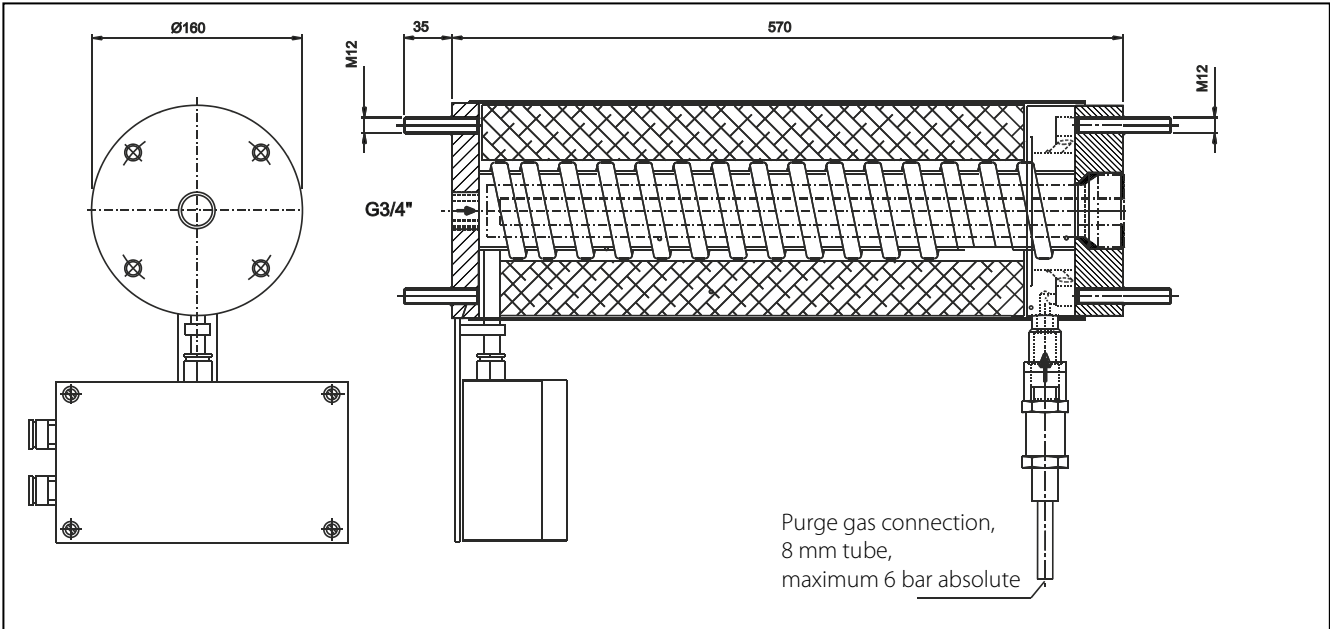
Dimensions and design of the adapter tube AR-500-R/BB with 3/4" thread
